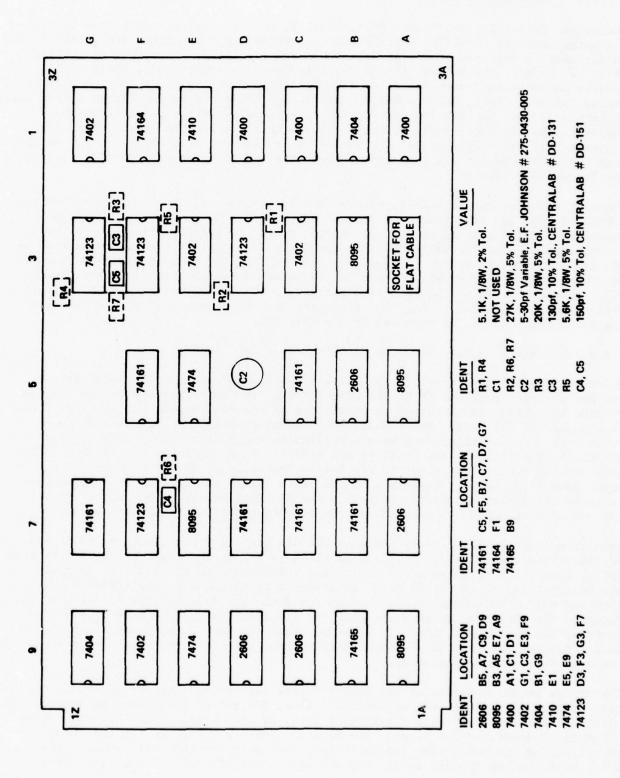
Host Interface Board, Parts Layout Diagram and Parts List
